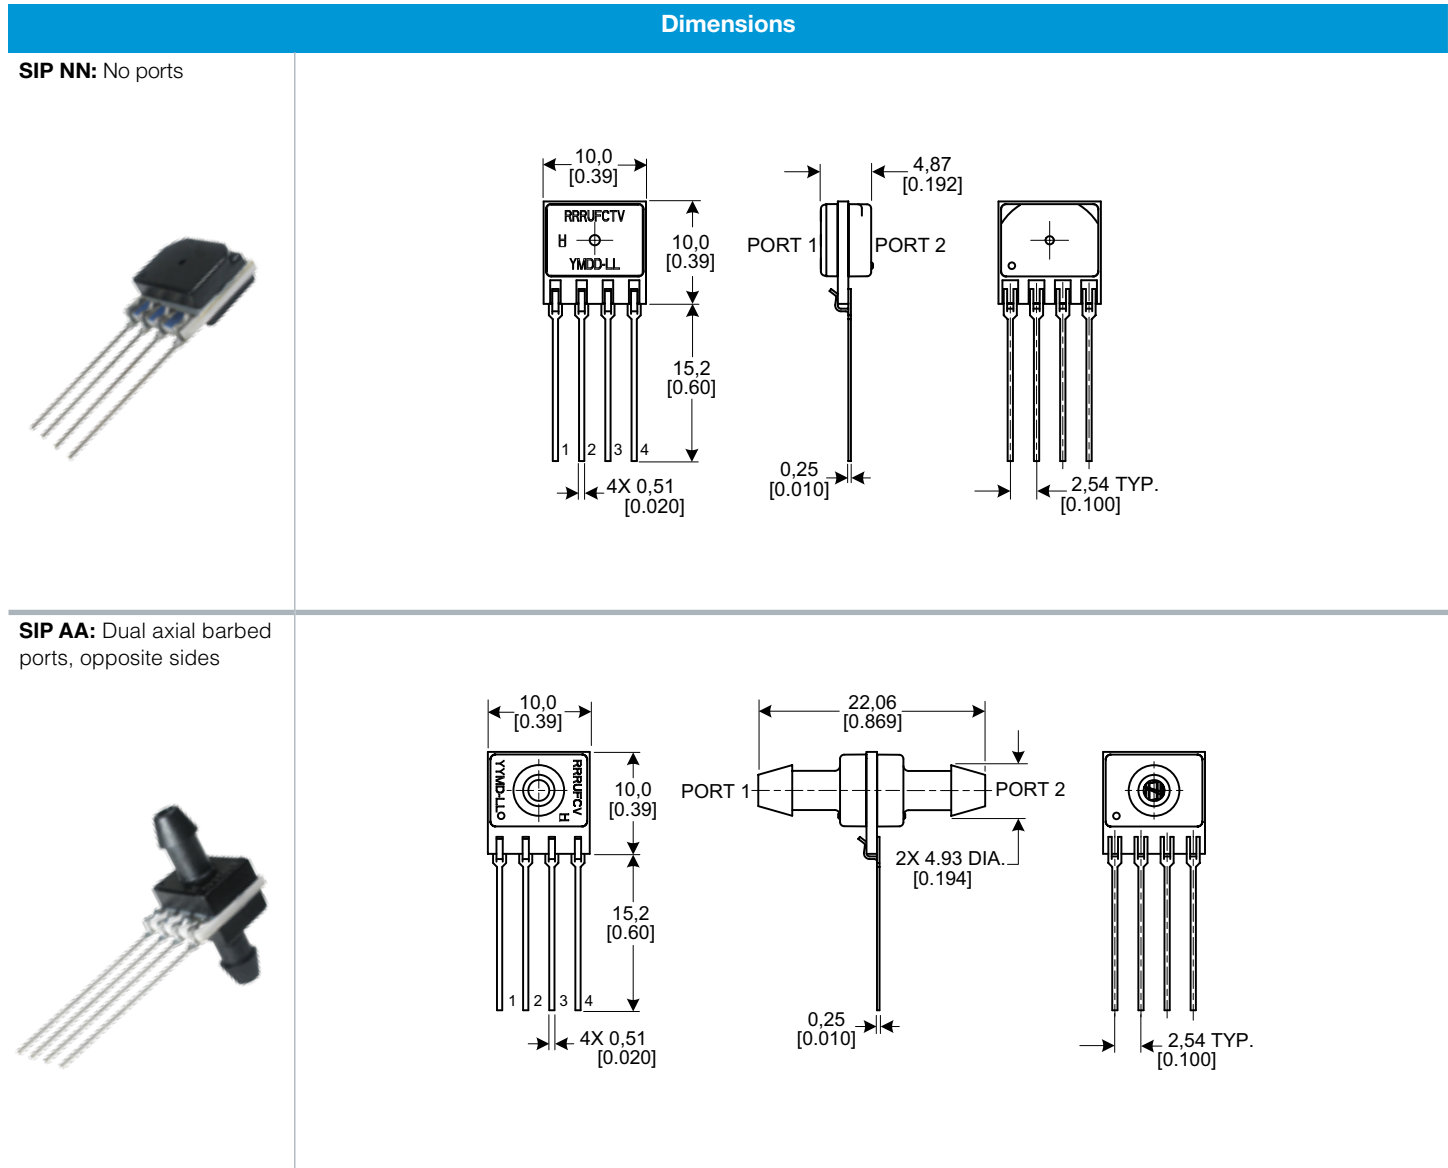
SIP Package Dimensional Drawings (For reference only: mm [in.]
